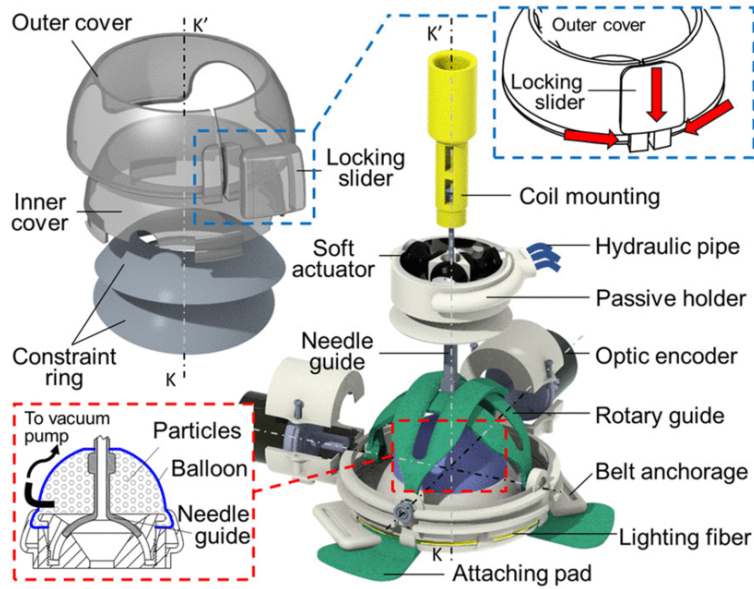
The detailed design of the robot with soft fluid-driven actuator
